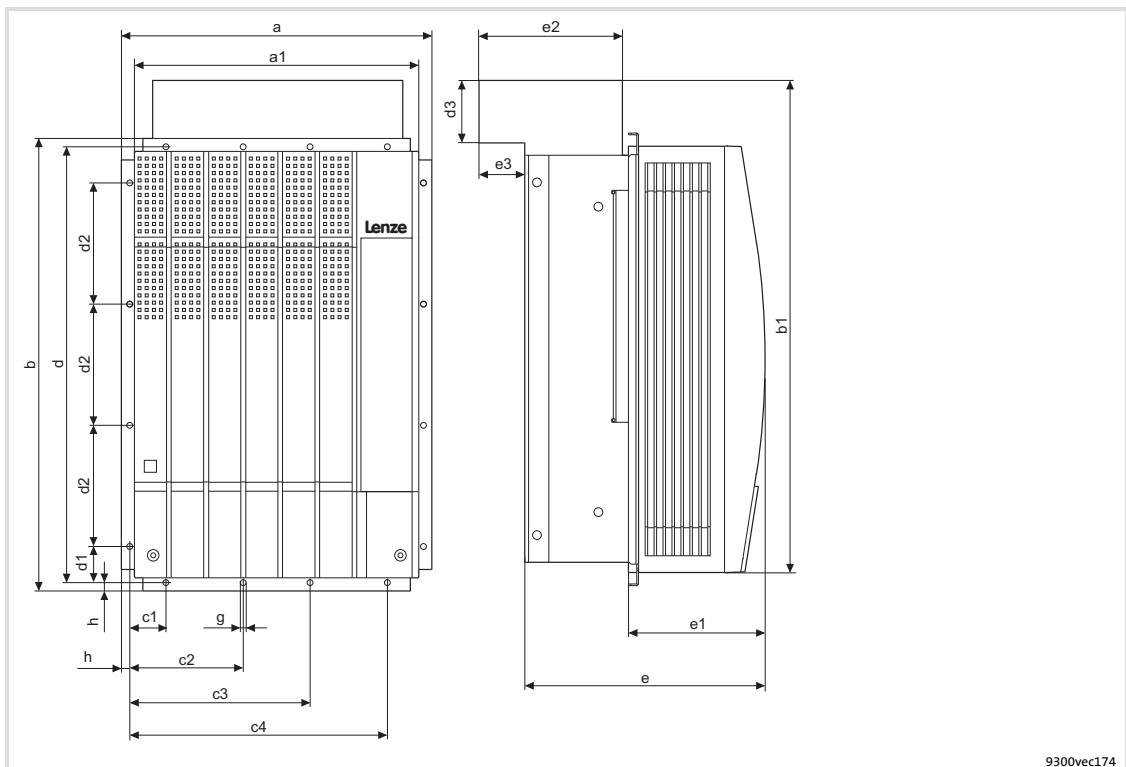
Dimensions for thermally separated mounting 55 kW
